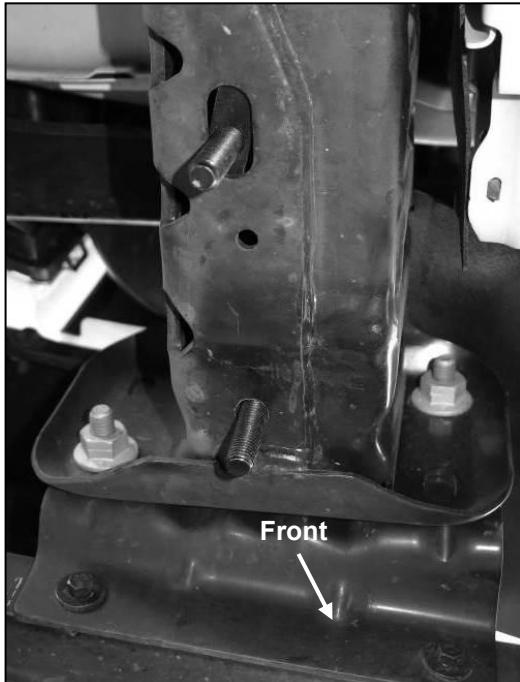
Insert Fish Wire through the frame slot and out previously drilled hole
